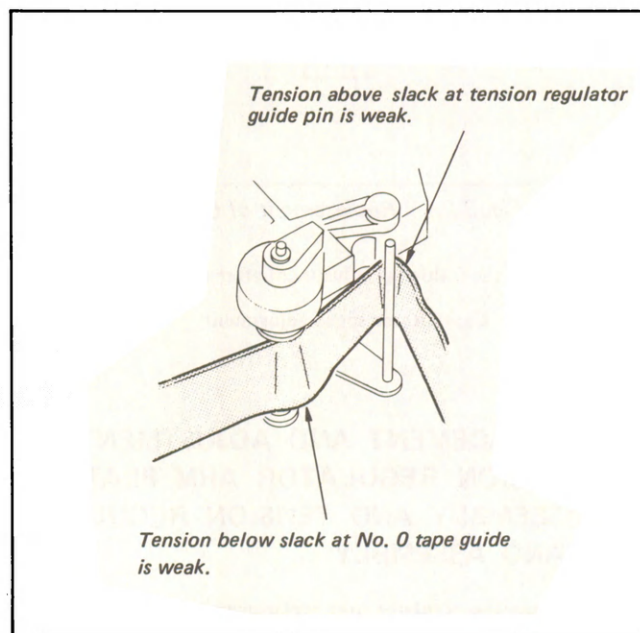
Replacement and adjustment (3) of tension regulator arm plate assembly
